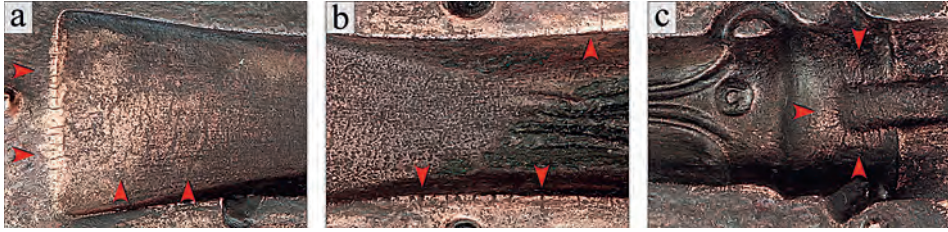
Thermal fatigue cracks left on the inner side of the casting mould from Elgiszewo: a – blade part; b – socket part; c – neck part.
